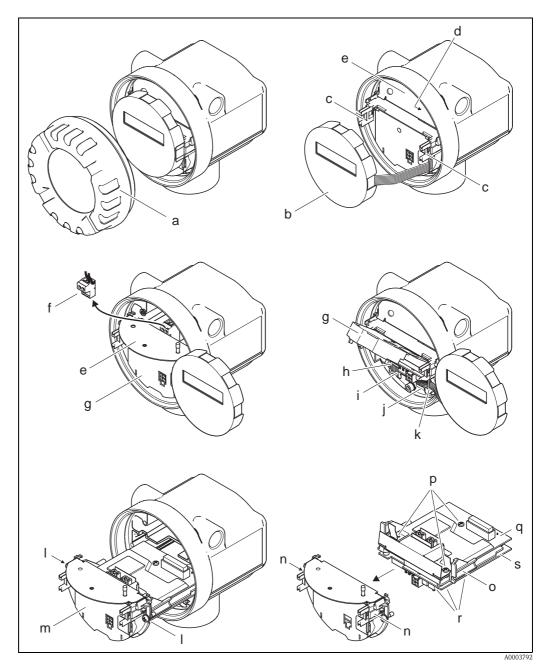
Installing and removing electronics boards, Non-Ex, Ex i/IS and Ex n version
